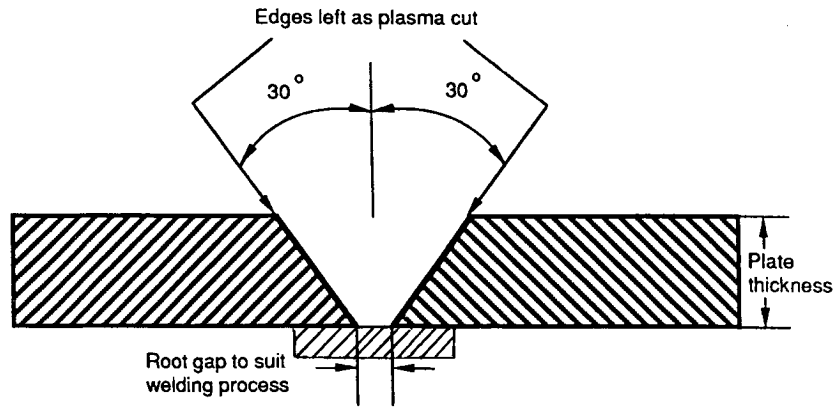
Weld preparation for the single-vee butt joint.
